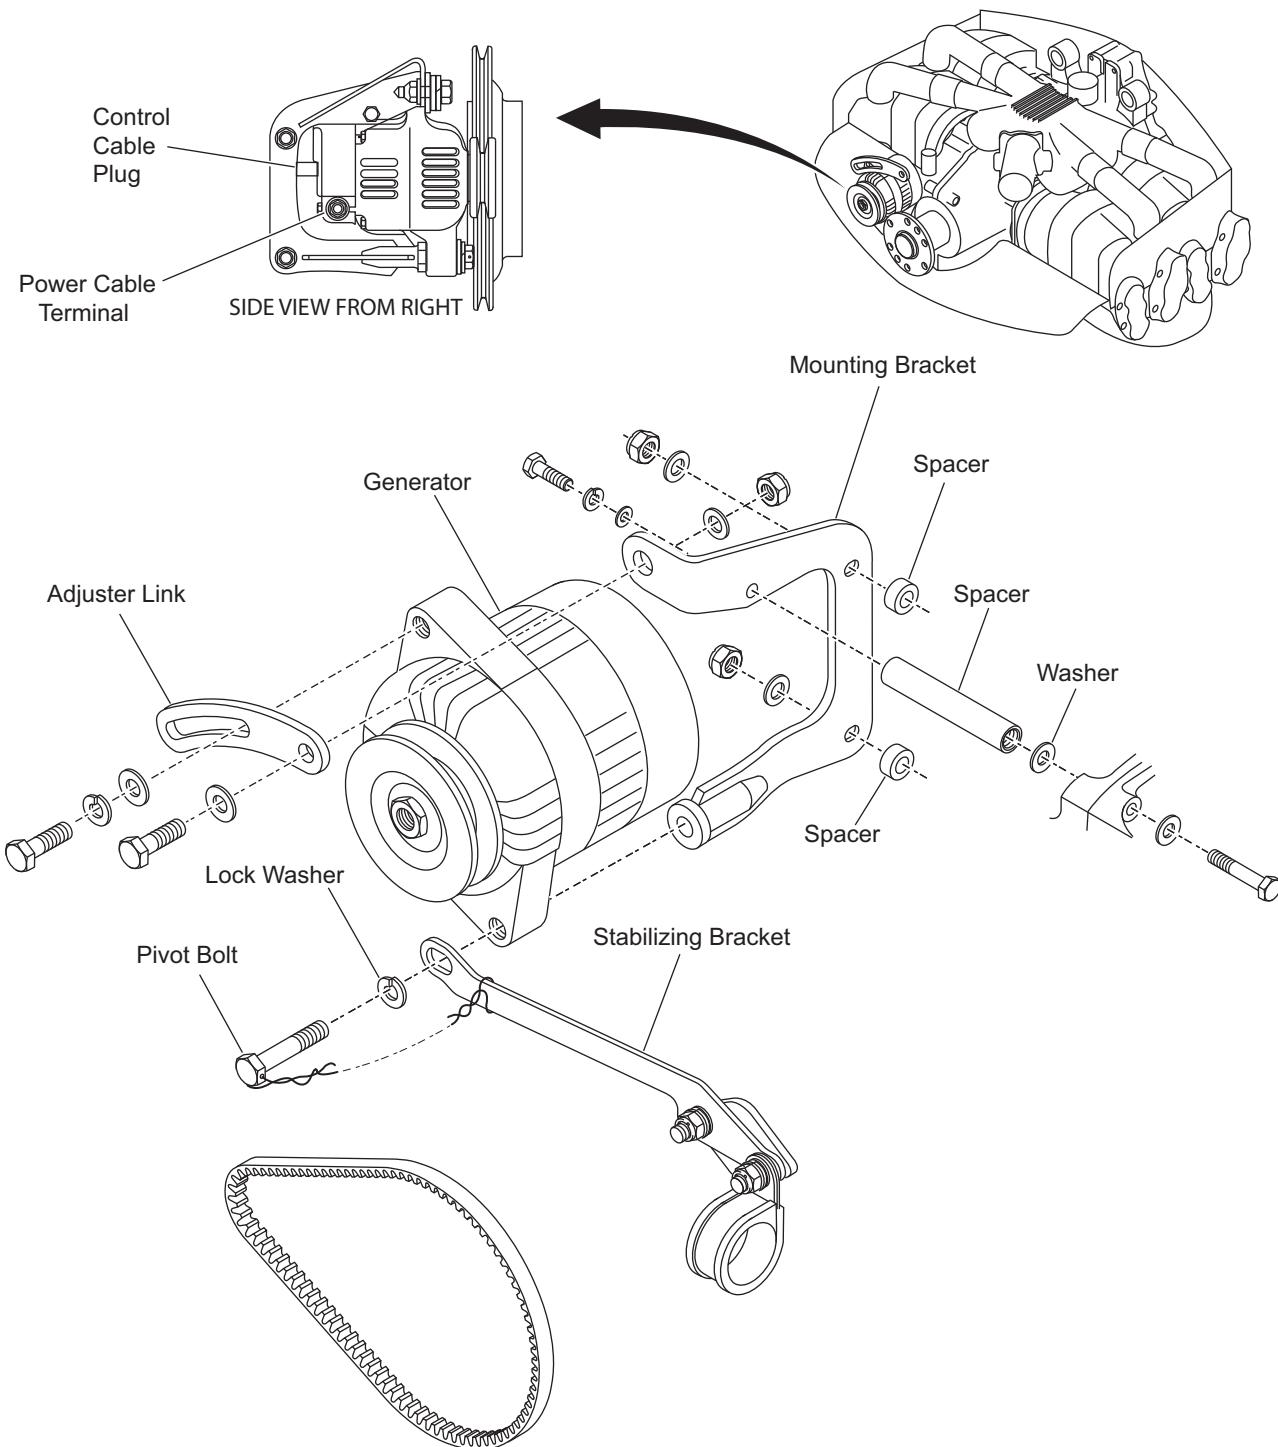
Generator/Alternator Mounting Bracket - Removal and Installation
